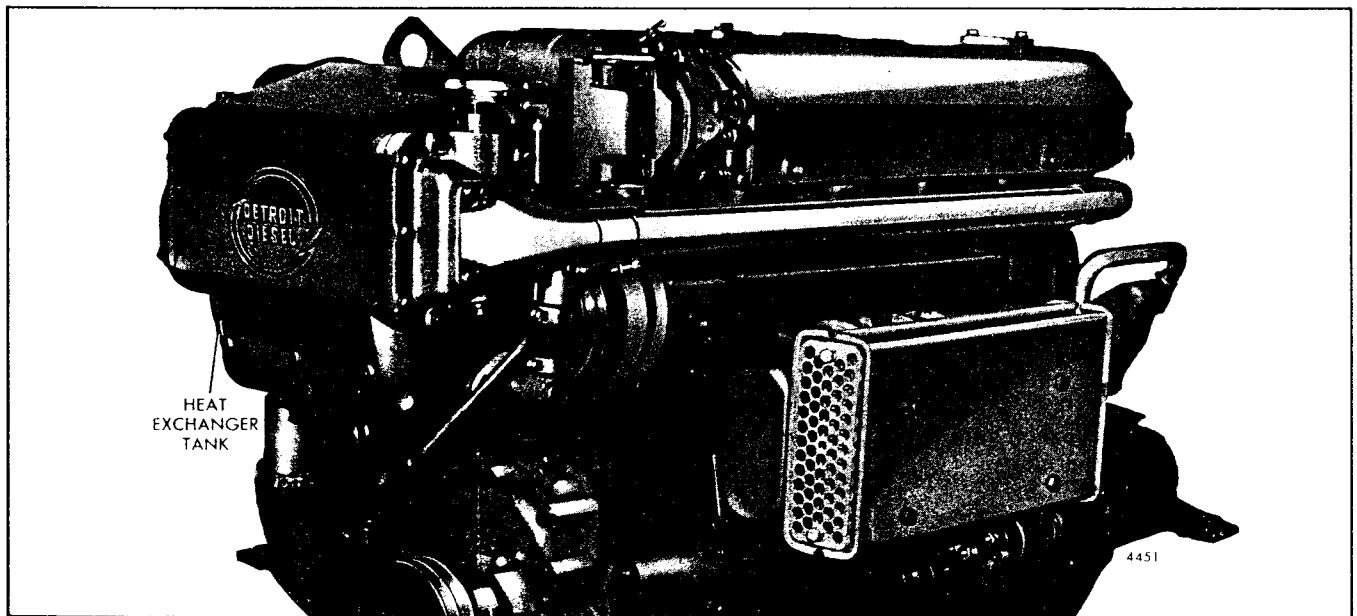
Typical Heat Exchanger Mounting In-Line Engine
